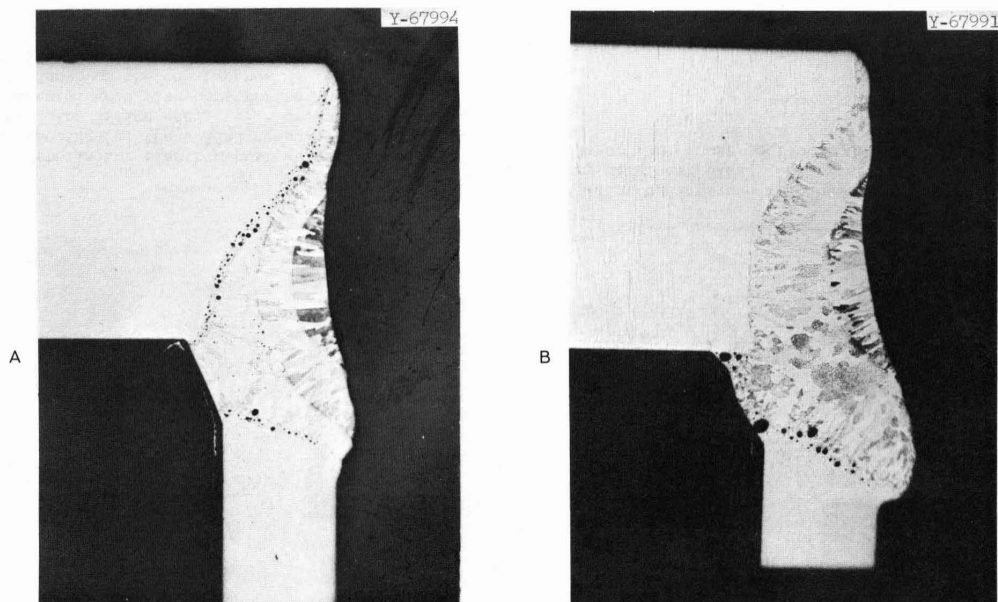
Electron-beam welds in W-25% Re specimens showing the effect of fabrication history on fusion-line porosity. (a) Weld with extruded cap and sleeve both fabricated by the powder-metallurgy technique. Note porosity only at each fusion line. (b) Weld with cap fabricated by arc casting and extruding, and sleeve fabricated by powder-metallurgy technique and extruding. Note porosity only at sleeve fusion line. Approx 16X.
